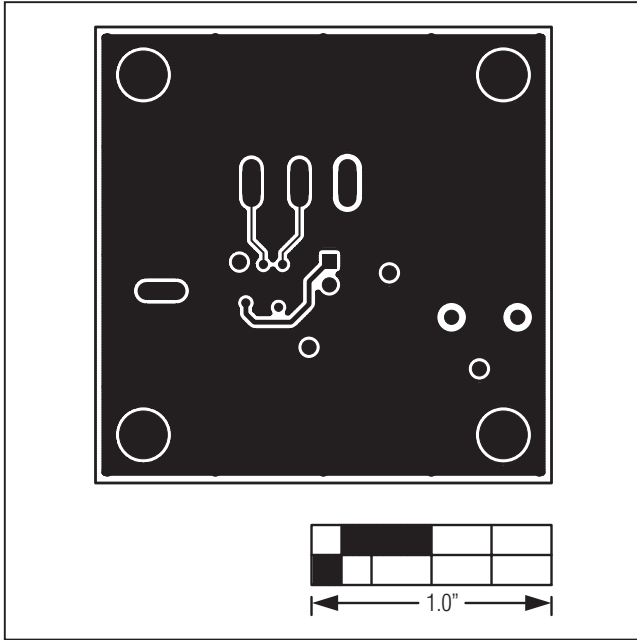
MAX97200A EV Kit PCB Layout—Layer 3
